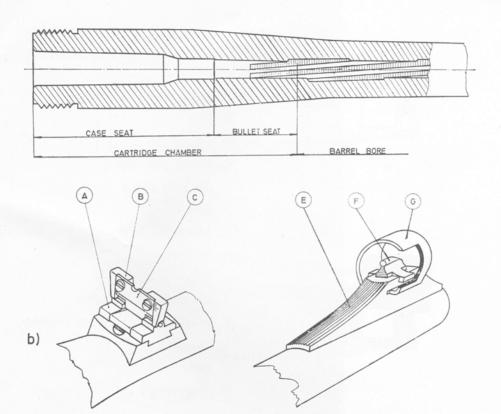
a) Rear part of the barrel, sectional view b) Rear and front sight
